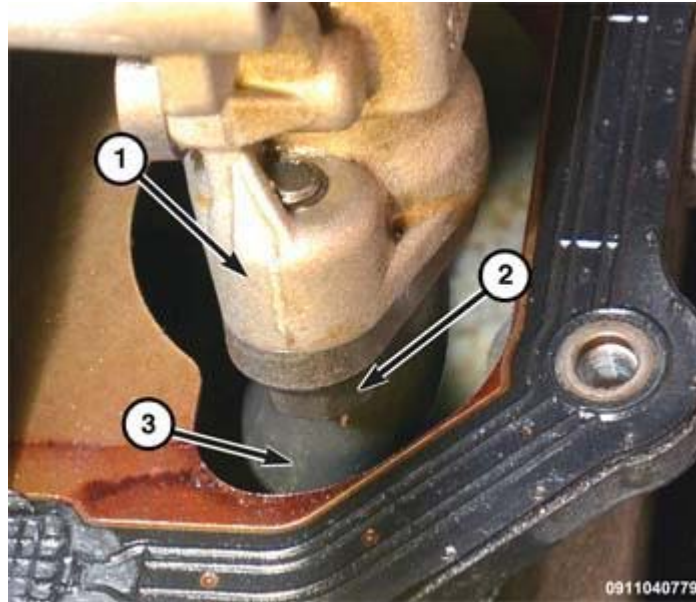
Engine Oil Pump Body, Oil Pump Pickup Tube & Retaining Bolt
